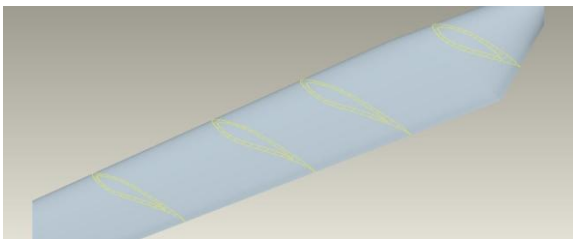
Three Dimensional Sectional view of Wind Turbine Blade
